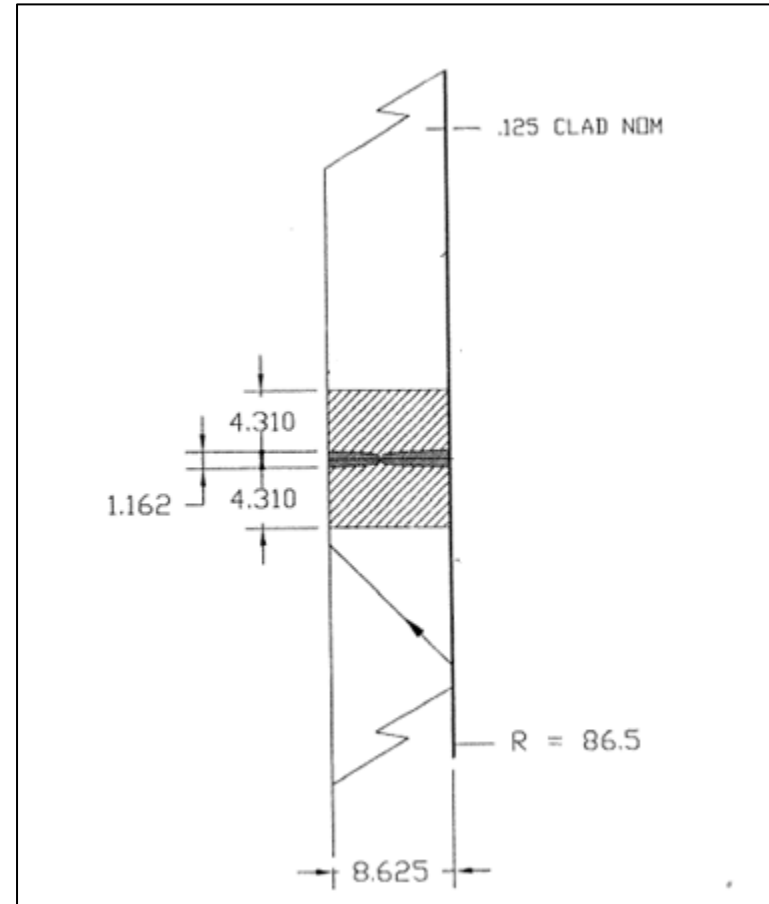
Plant A Intermediate Shell to Lower Shell Circ Weld
